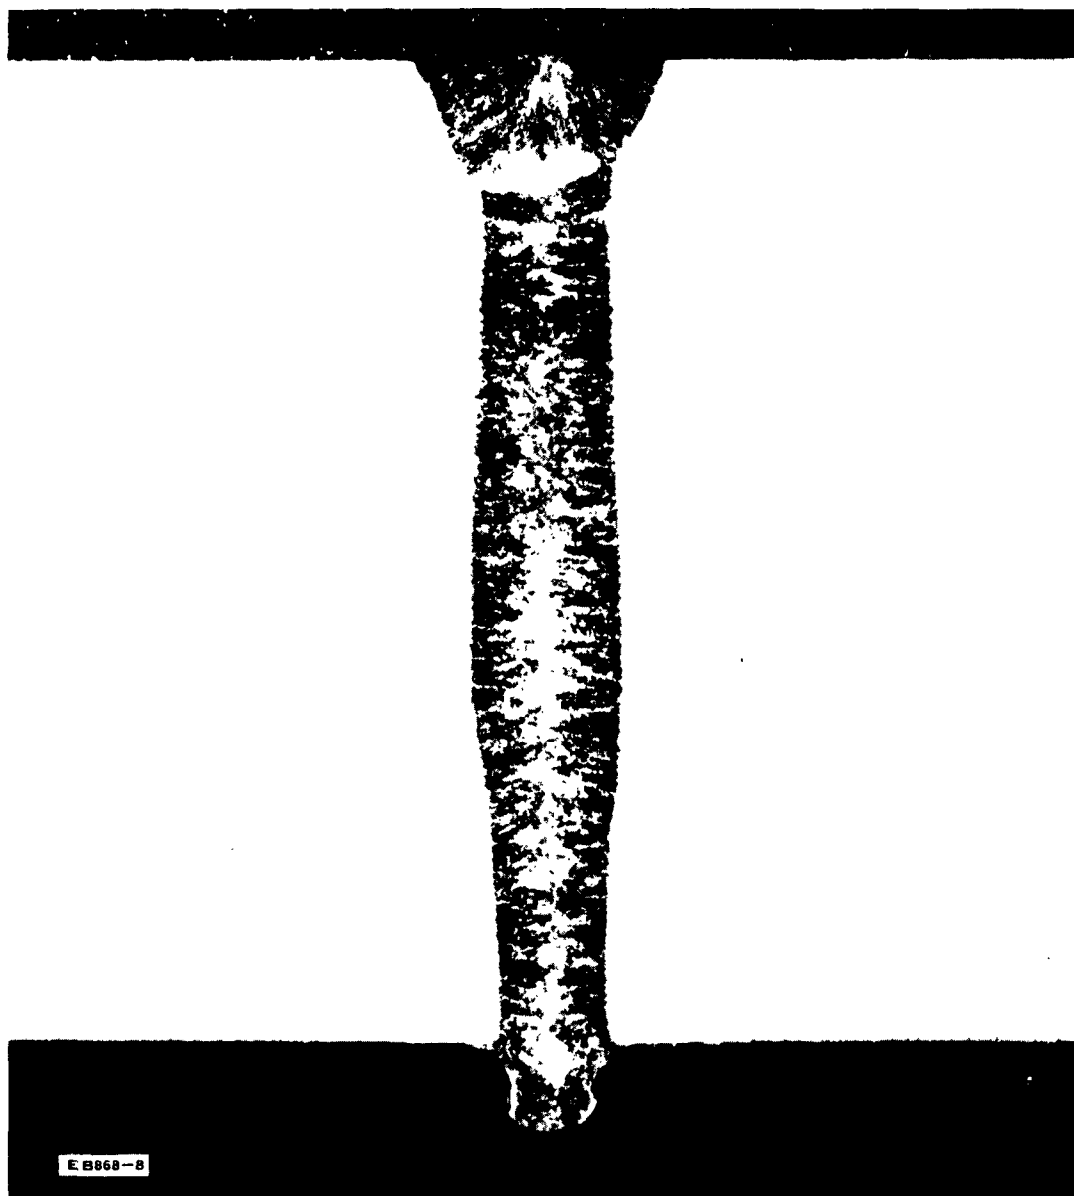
Trial Weld Cross-section; X20; 0.290-Inch D6AC; 150 KV, 21 ma, 24 ipm, 0.005-Inch Y Oscillation, With Second Clean-up Pass
